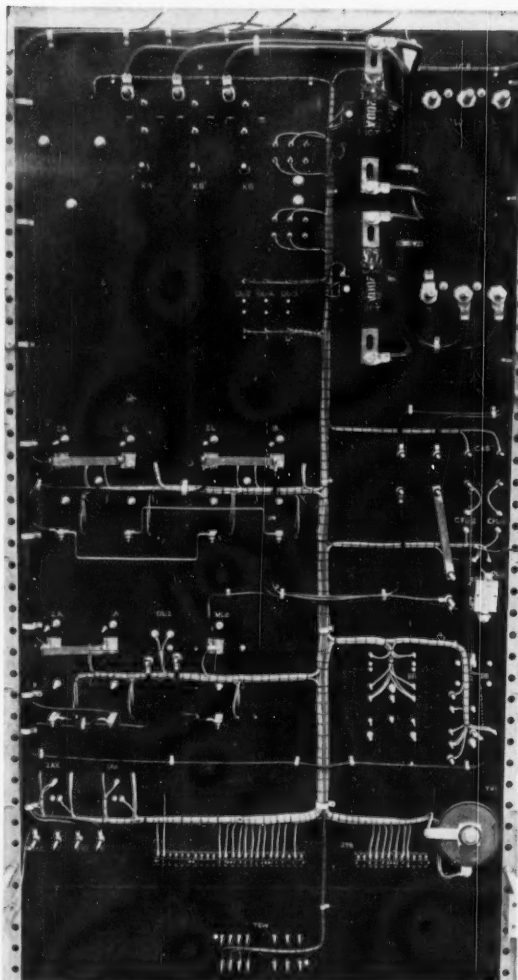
Harness wiring. In this technique wiring is completely prefabricated before it is mounted in equipment. It is particularly applicable to mass-produced machines, such as automobiles.
